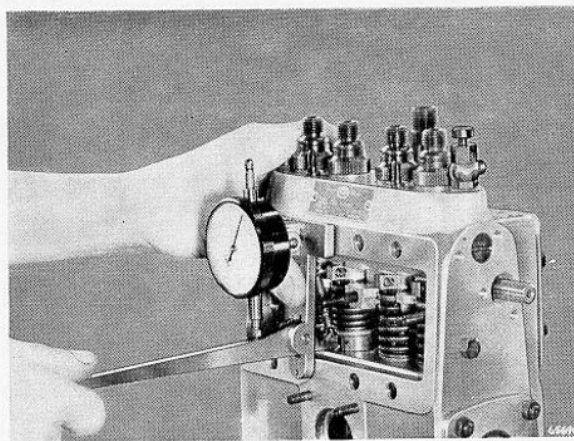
CHECKING HEAD CLEARANCE USING GAUGE 7144/166—TYPICAL ILLUSTRATION
